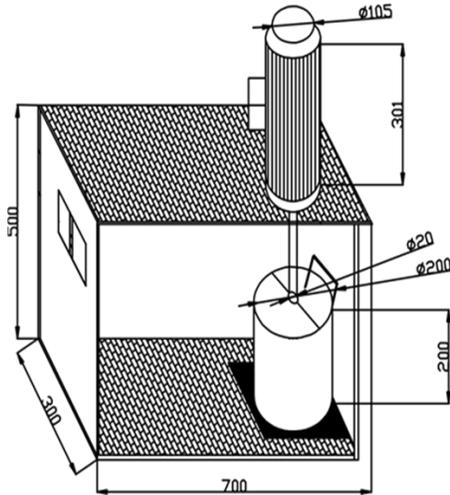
Isometric view of yam boiling and pounding machine (all dimensions are in mm).
